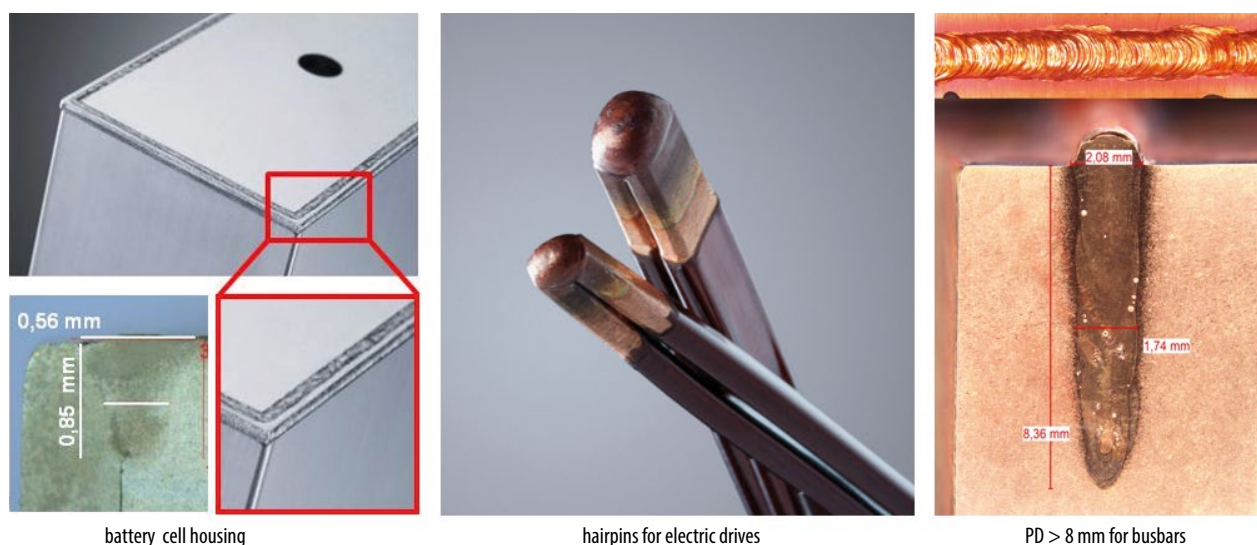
Application examples of BrightLine Welding for copper, aluminum and steel welding (Source: Trumpf)
